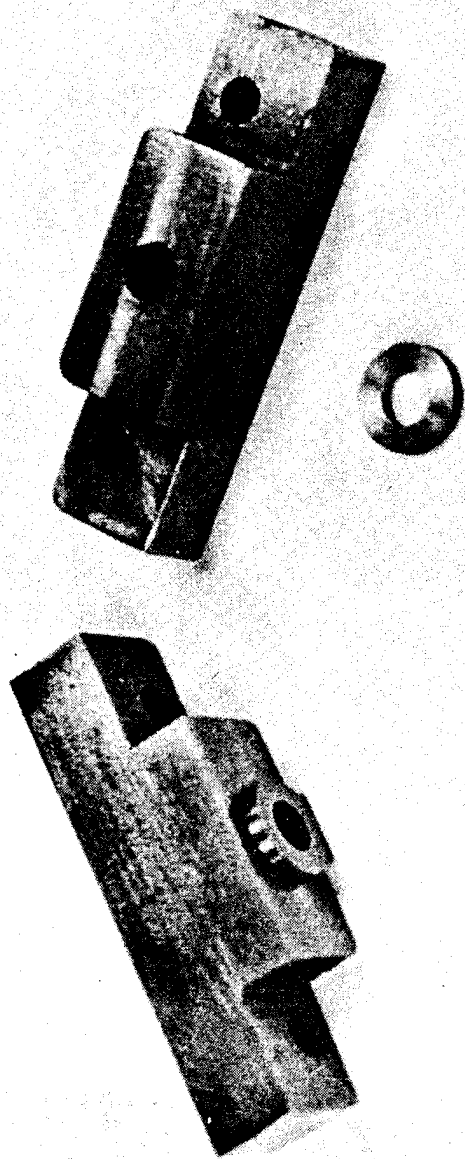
BOLTED JOINT - OUT OF PLANE CONSTRAINTS
